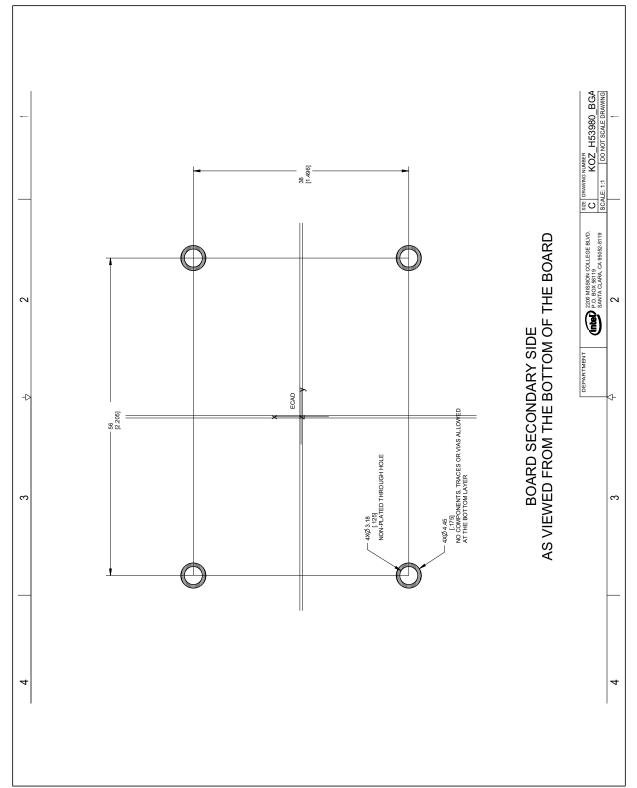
PCB Mechanical Keep-out Drawing - 4 Hole Heatsink (Sheet 2 of 2)
